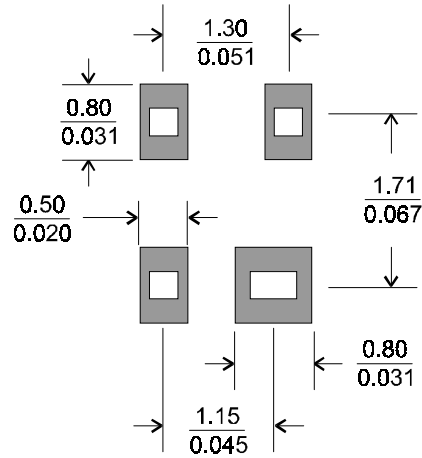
PCB Pad Print for SOT-343 Package (mm/inches).
